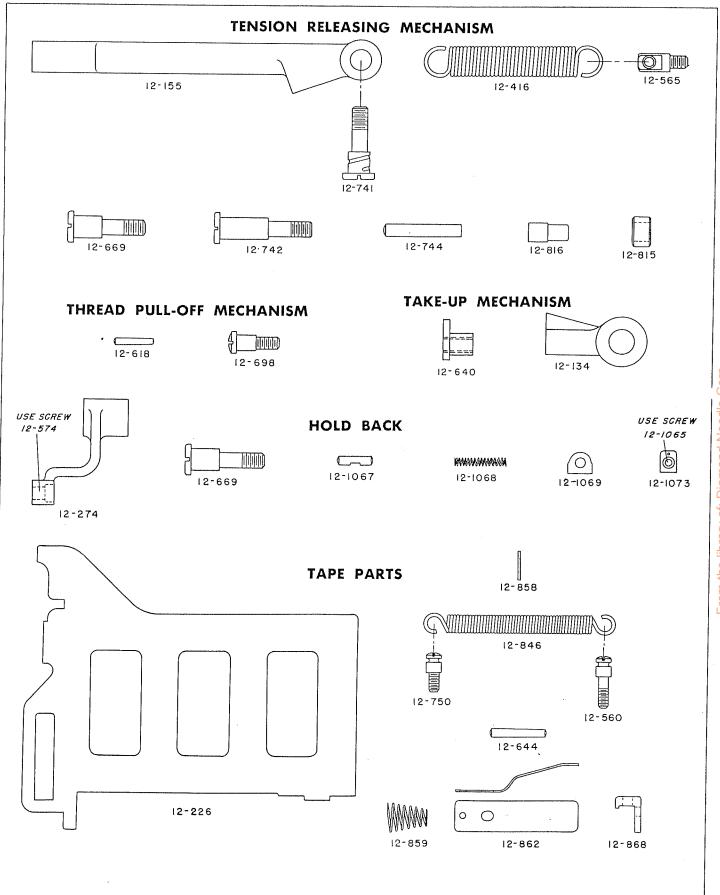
Tension Releasing, Take-Up, and Thread Pull-Off Mechanisms, Hold Back, and Tape Parts (approximately ½ size)
